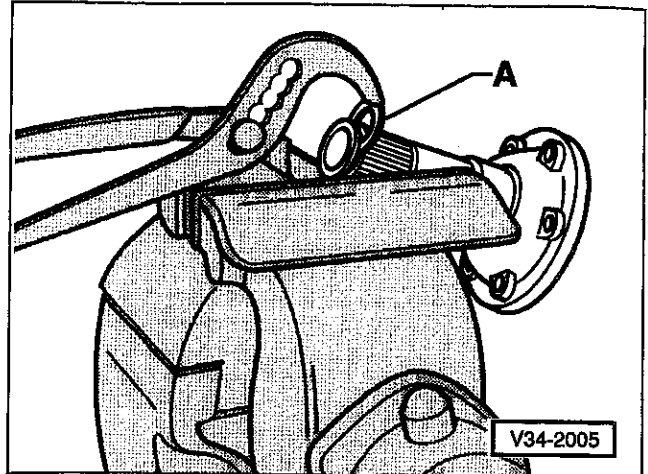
Remove drive flange/axle shaft by placing spacer (A) beneath flange and pull flange from differential by threading bolt onto spacer (cold chisel shown).
